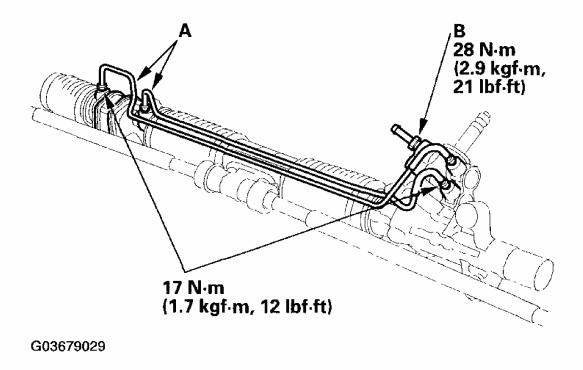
Installing Cylinder Lines And Tightening Flare Nuts To The Specified Torque
